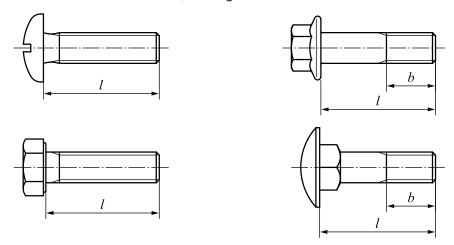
Length for bolts and screws with effective bearing surface perpendicular to the axis
